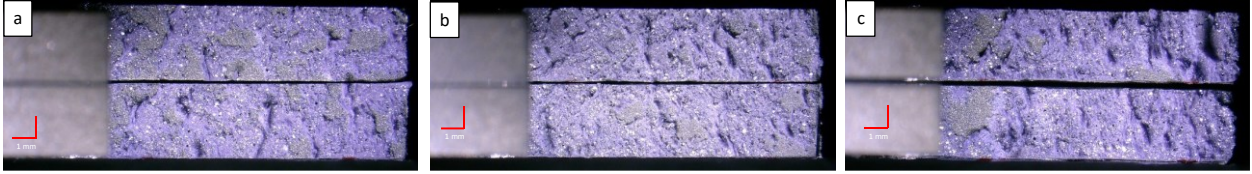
Typical fracture surface of bonded shear specimens for 0.18 mm (a), 0.3 mm (b), and 0.64 mm (c) bond line thickness
